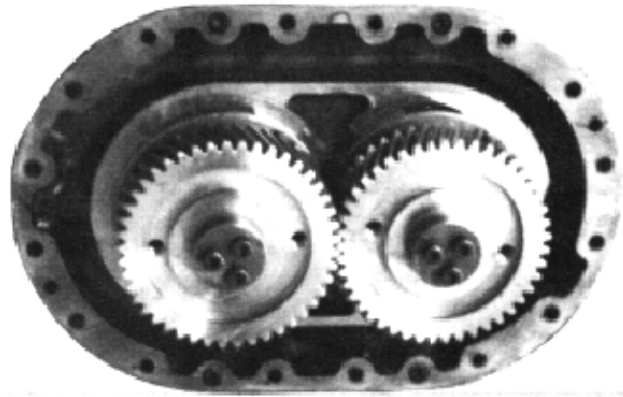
LOCATION OF TIMING GEAR BOLTS
